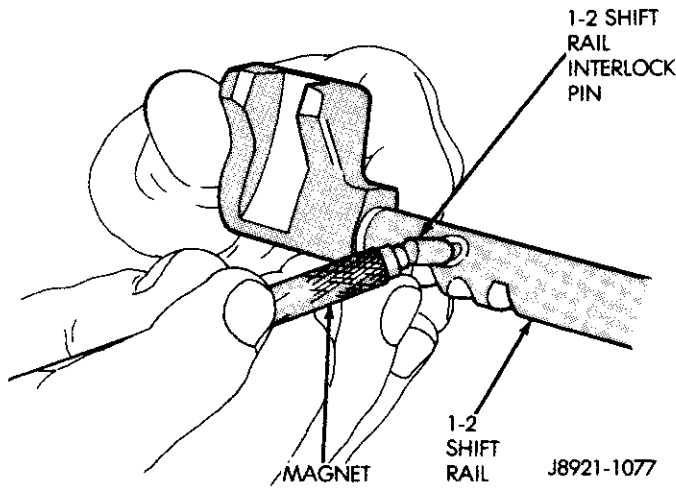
Removing 1-2 Shift Rail Interlock Pin
